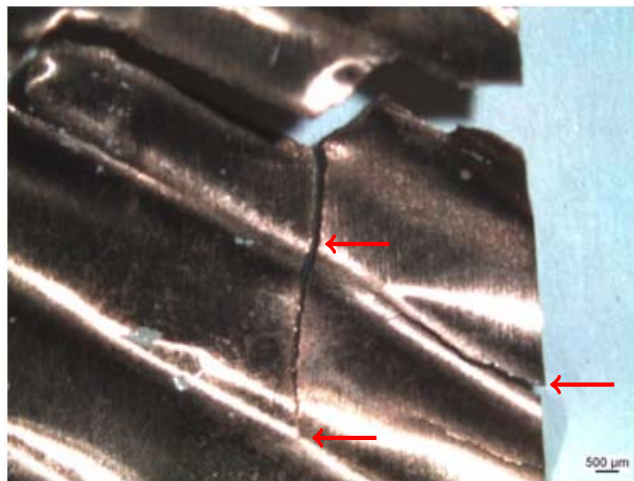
Optical microscope view of aluminium sheath internal surface showing fatigue cracks caused by cyclic cable bending.
